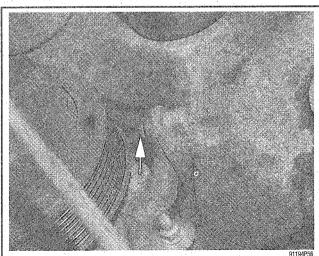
Remove the retaining bolt for the CKP sensor and remove the sensor from the front cover
